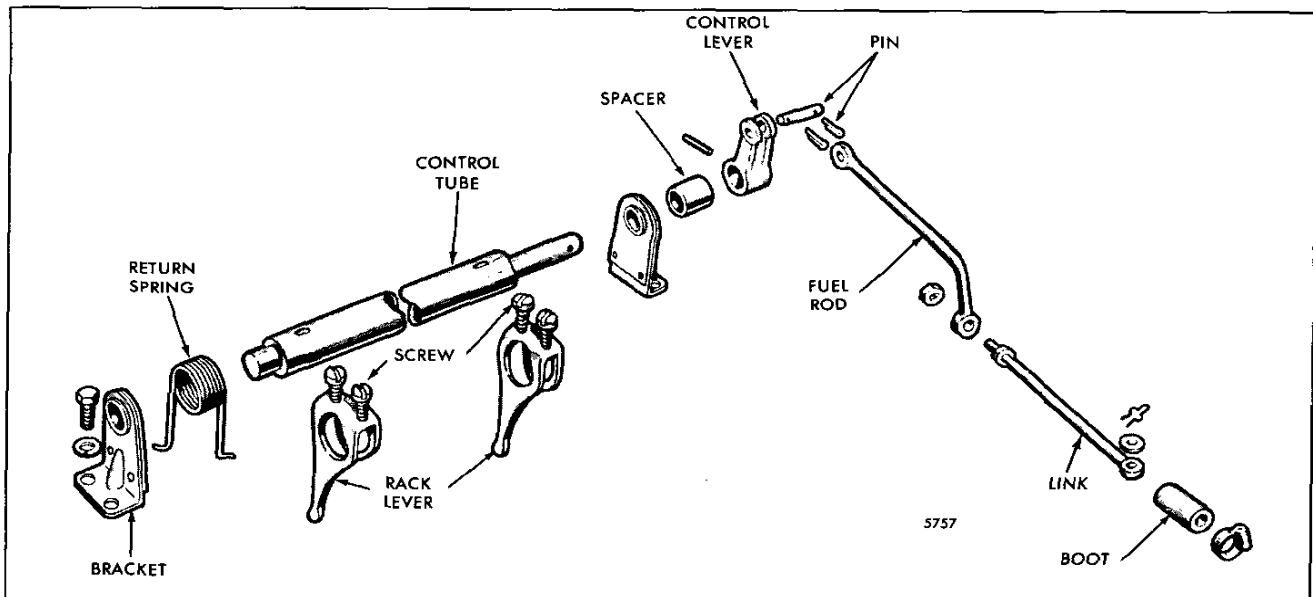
Injector Control Tube Assembly (Non-Spring Loaded - V Engine)
